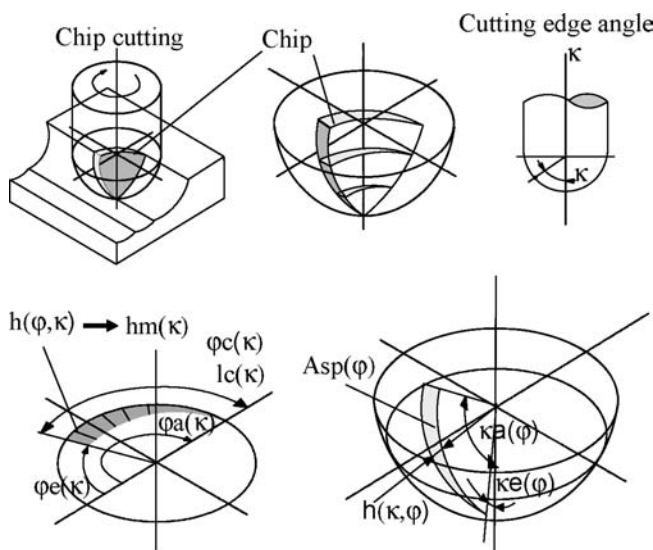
Process and chip parameters in milling using ball-end cutter [16].
